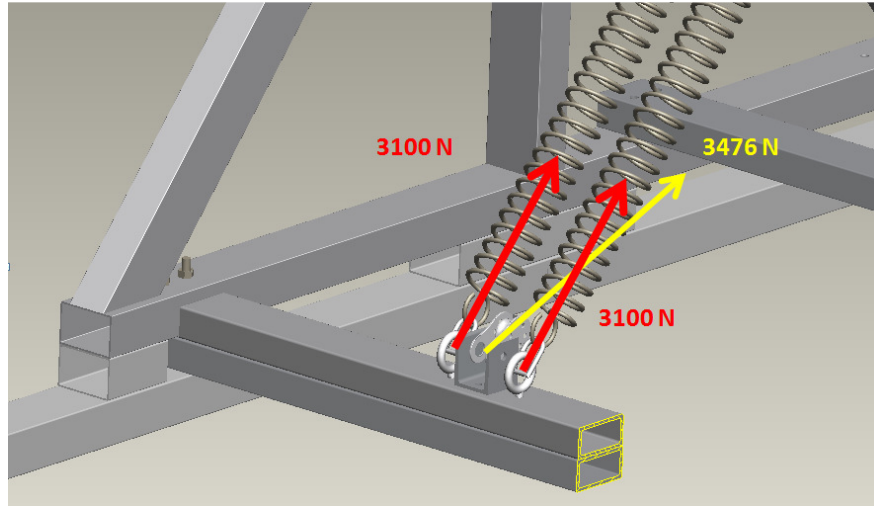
Cross-section of Crossbeam Showing Loading Condition
